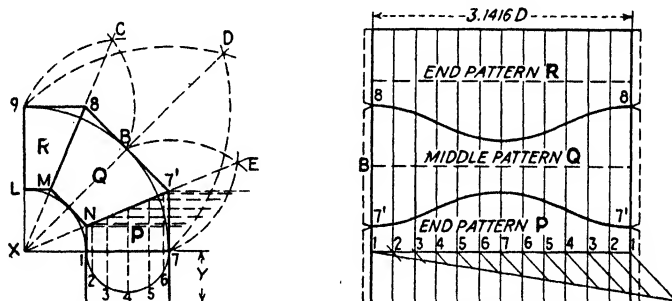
Design of three-piece 90-deg. elbow by method of bisecting angles.
